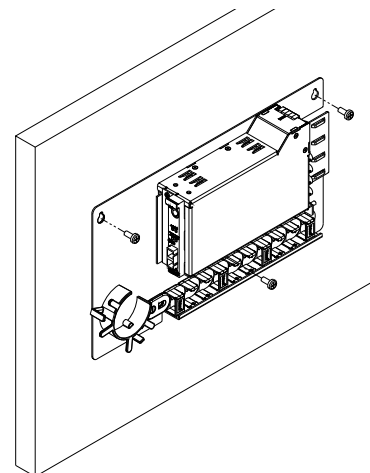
OTM Standalone, Wall-Mounted Chassis
